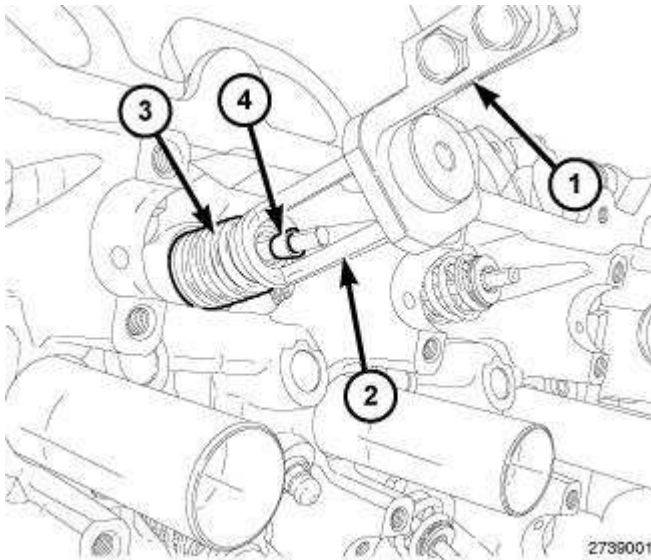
Compressing Valve Spring & Locating Valve Retaining Locks
